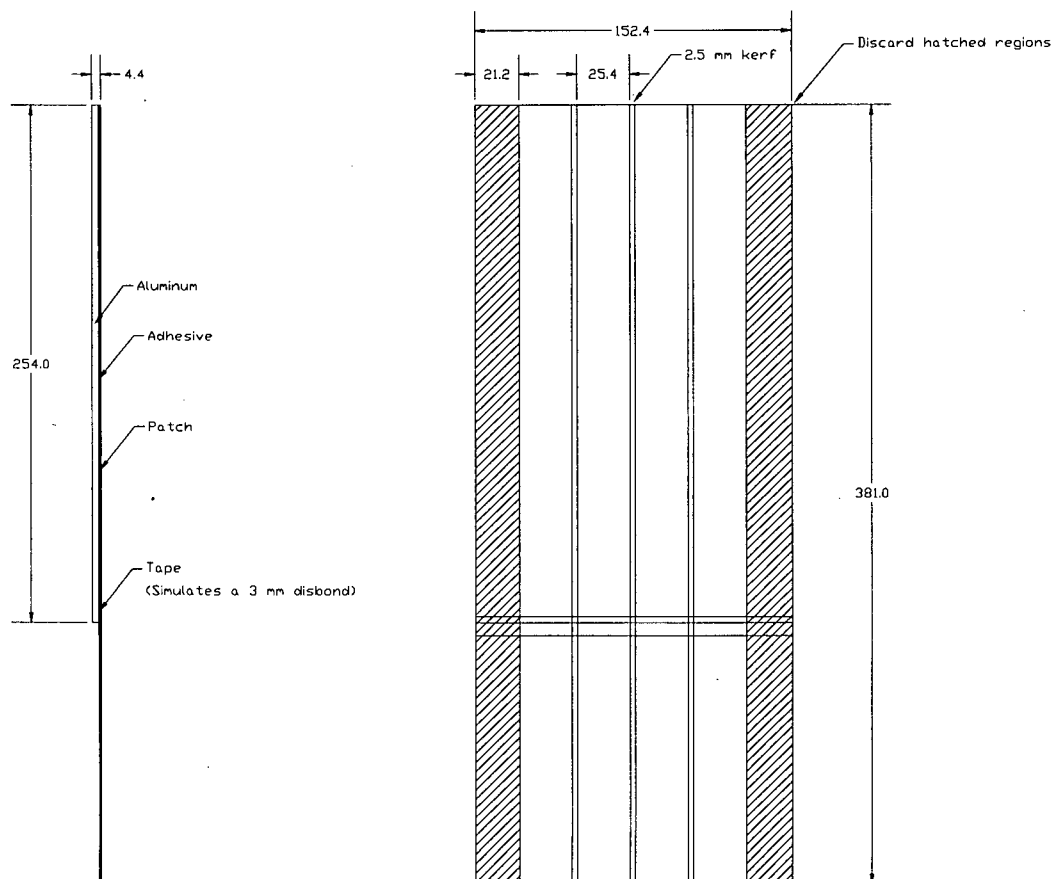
HS-DLJ specimen composite panel assembly drawing
